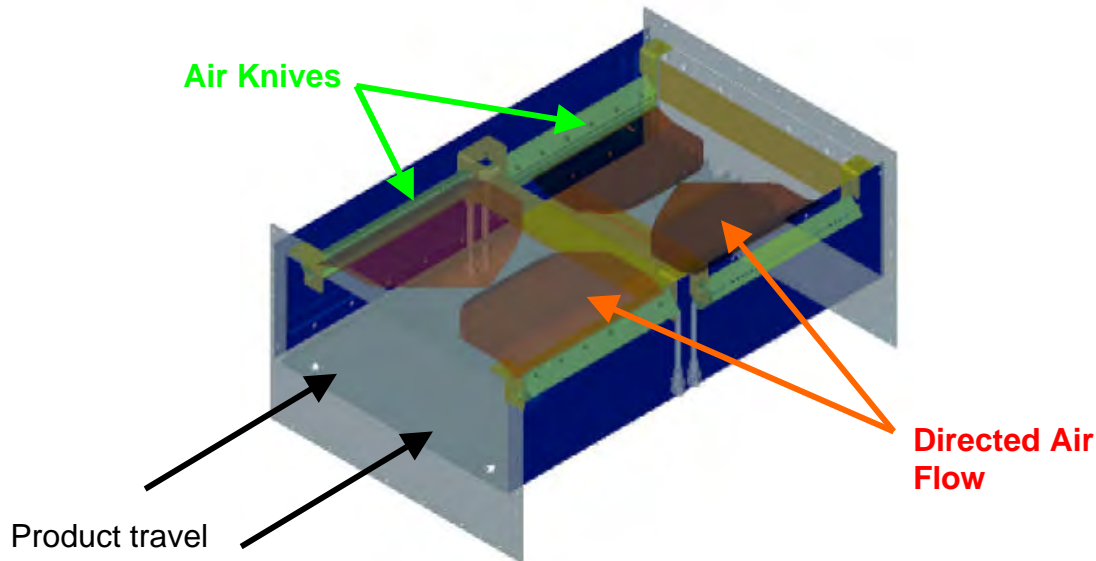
Internal View of the Controlled Atmosphere Cooling Convection Cooling Module
